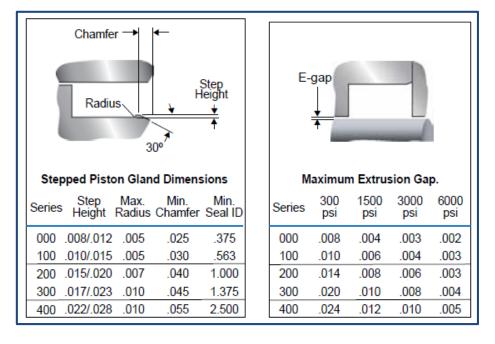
Piston Dimensions - Eriks Seals and Plastics
